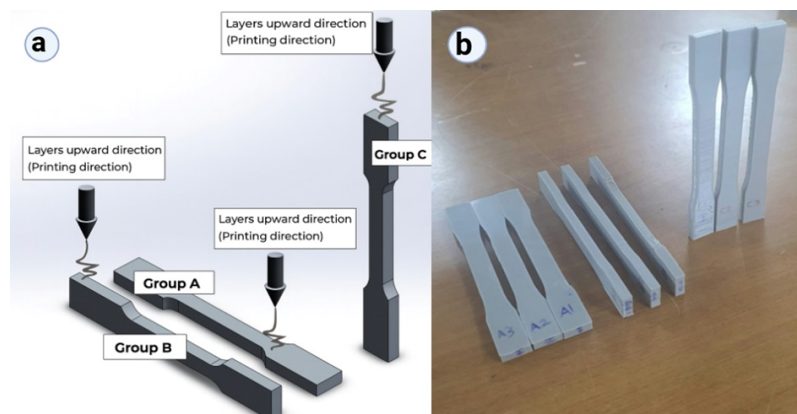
(a) Schematic of the tensile specimen; (b) printed tensile test specimens
